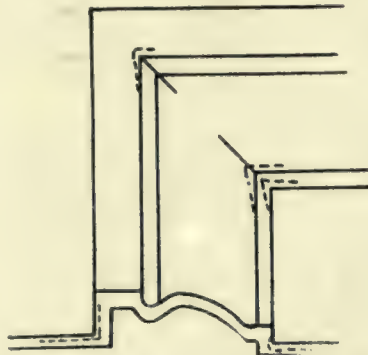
Corner of Cast Iron Panel Molding Showing the Effect of Repeated Casting. Three Shrinkages—Original Pattern, Pattern Plate and Casting.
